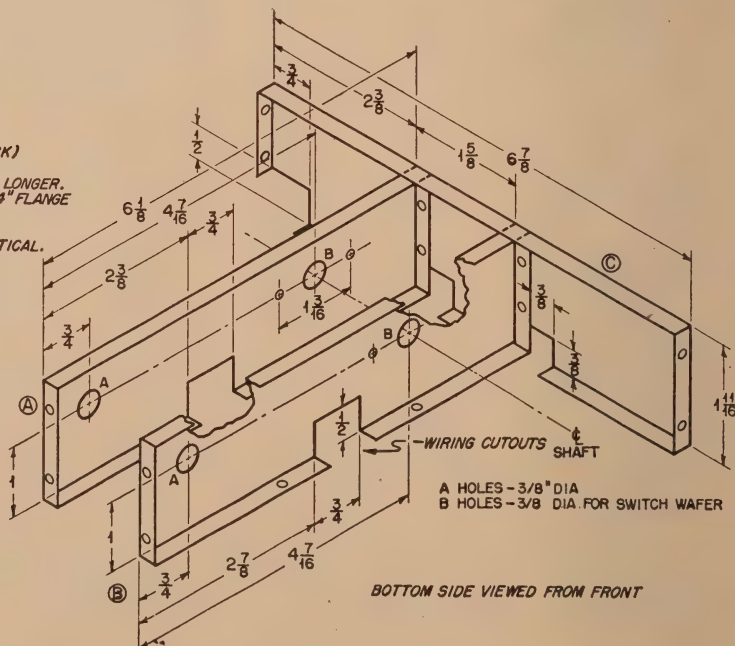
Partition dimensions. See Figure 81 for exact placement under the chassis.
